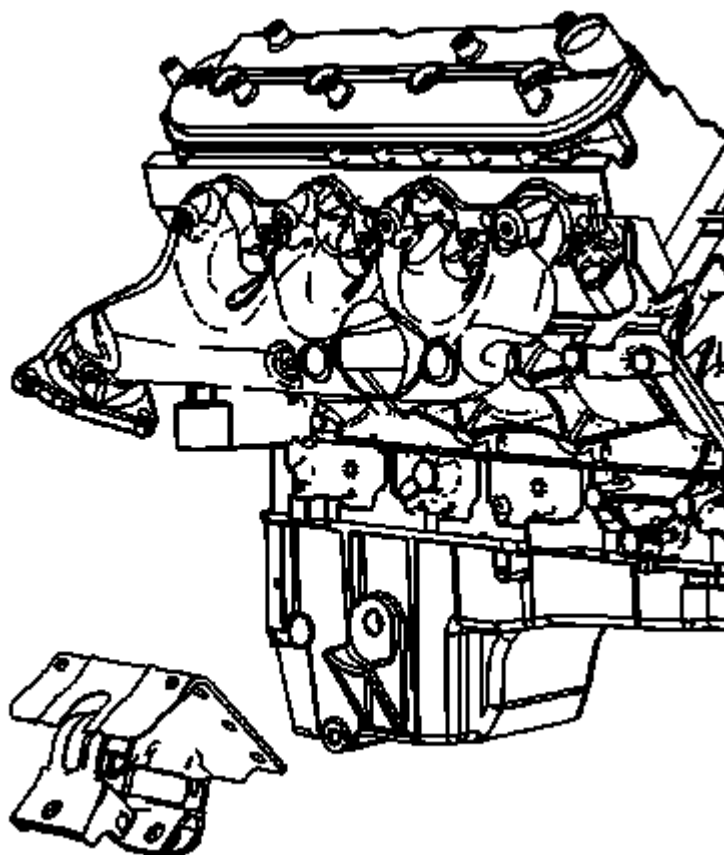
View Of Engine Mount To Engine Bolts
